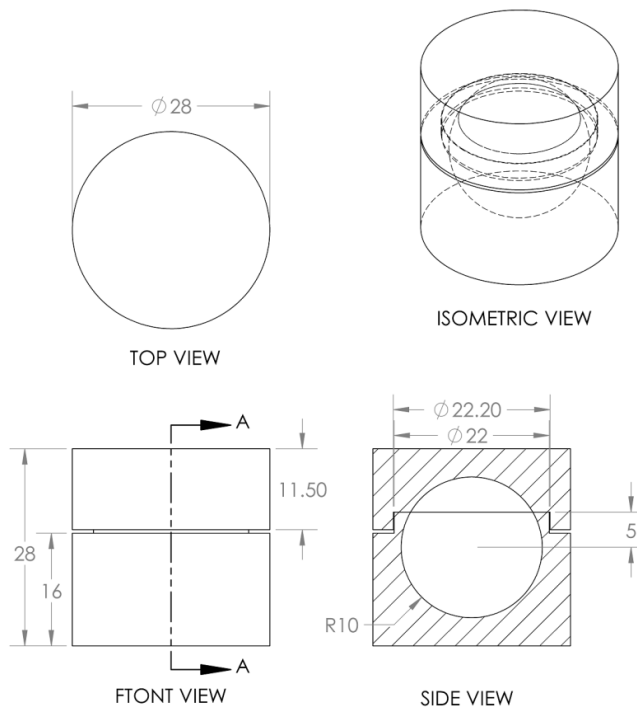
Orthogonal views of mold assembly for spherical actuator
